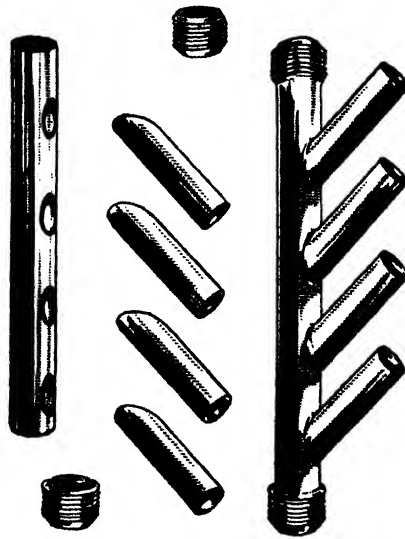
The die-cast aluminum-alloy de-icer manifold at the right is produced in one piece with threads cast and the only machining needed is to chase the threads and remove flash. This product, if not cast, would require two end fittings made in a screw machine and five pieces of tubing all welded together, at much greater expense.
